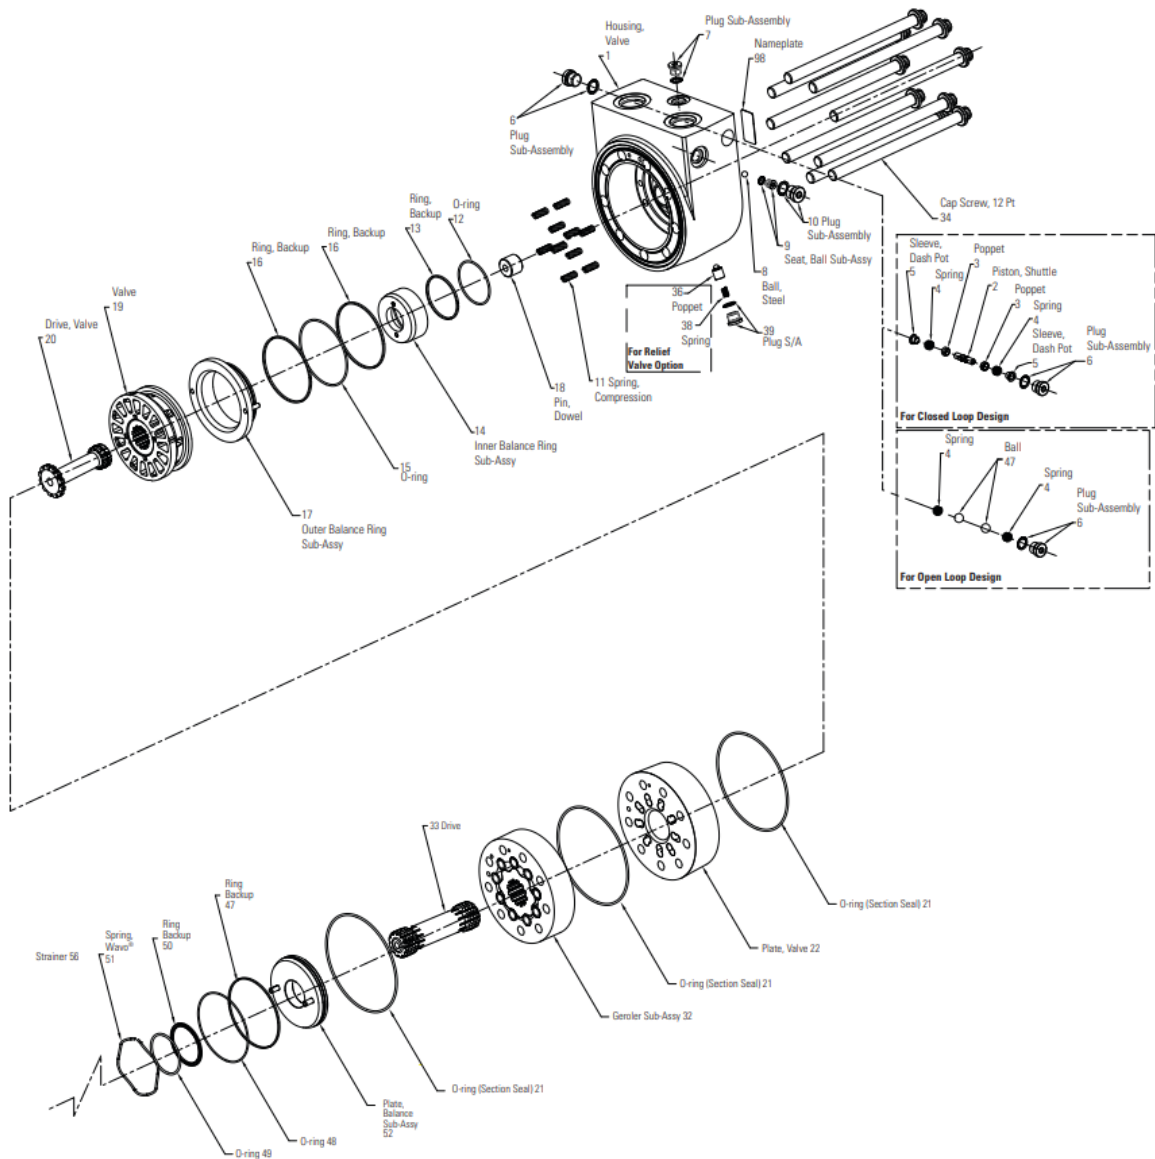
Single Speed Standard and Wheel Motor Exploded View
